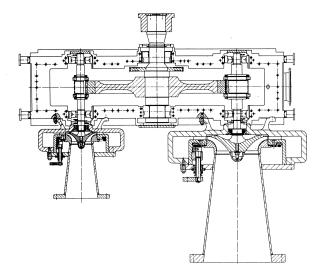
Two Stage Integrally Geared Radial Expander with Two Pinion Shafts.
